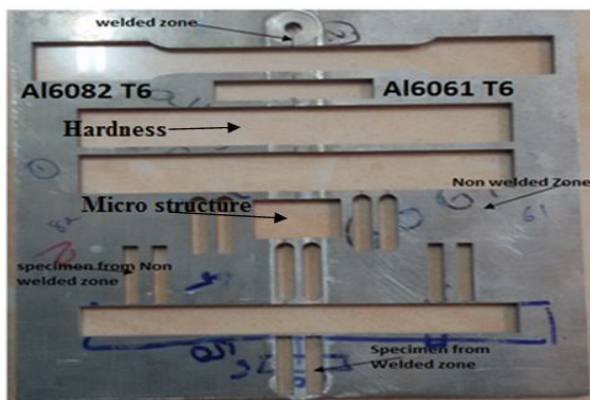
Friction Stir welded dissimilar joint (AA6061- AA6082) and indicating the specimens for Micro structure and Micro Hardness test.
